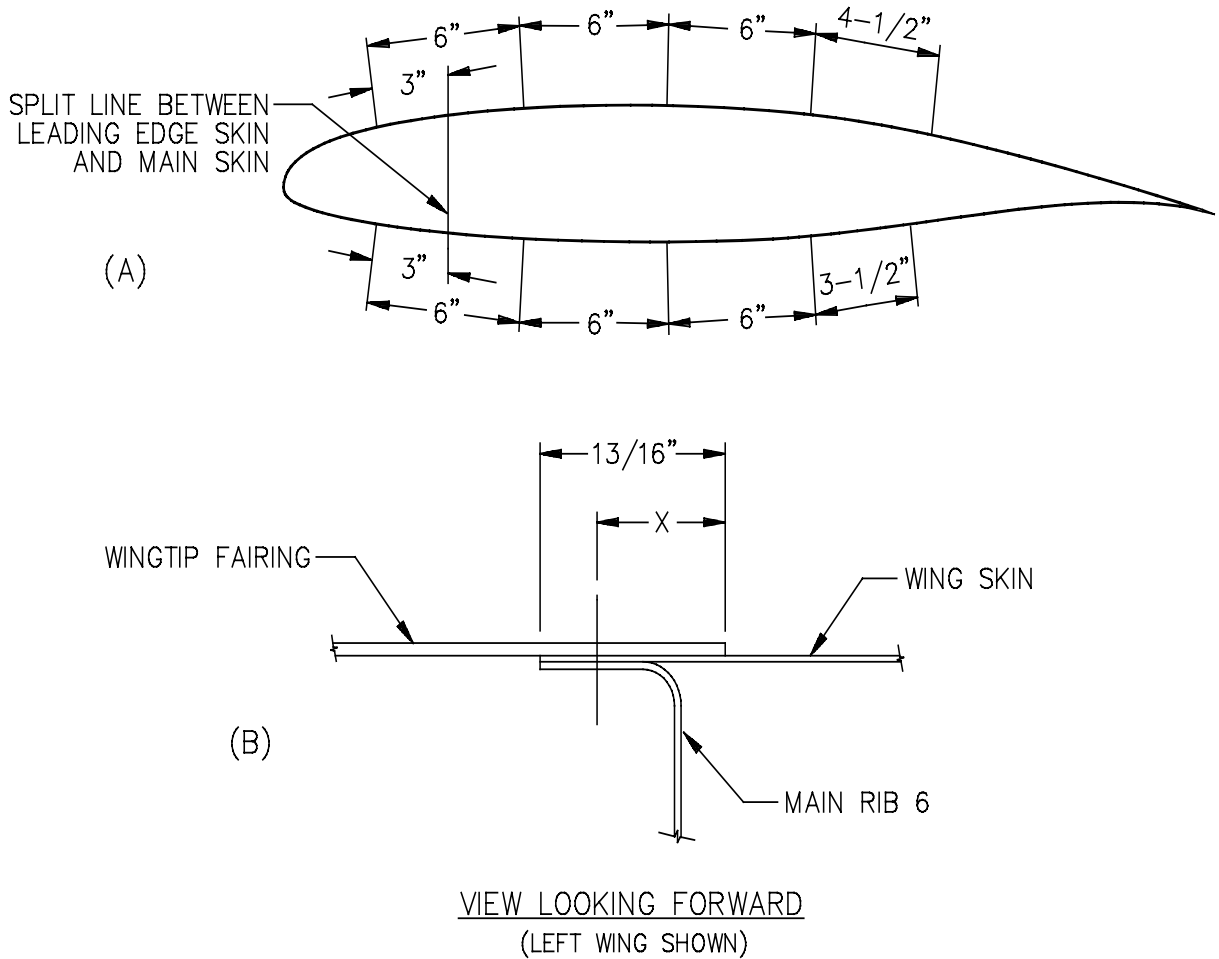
Marking the Fairing Mounting Screw Hole Locations
